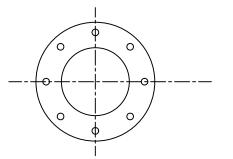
DETAIL - FLANGE ADAPTER AND BACK-UP RING
